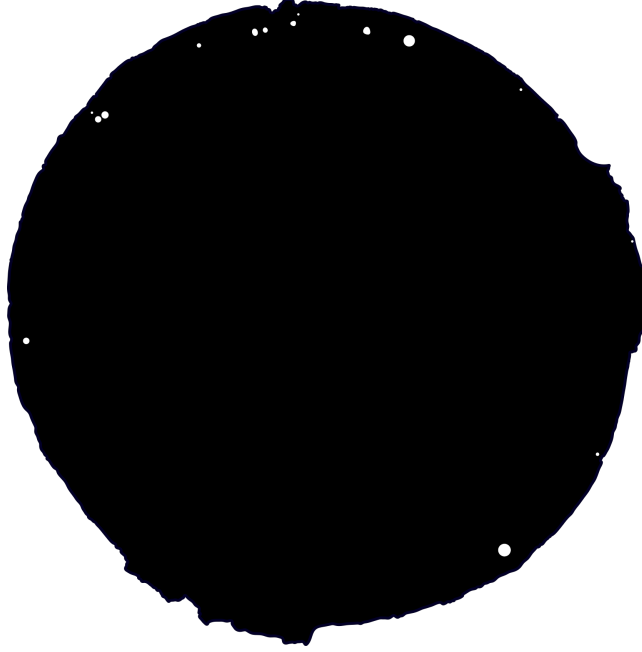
Gas inclusions observed in example fracture surface.
